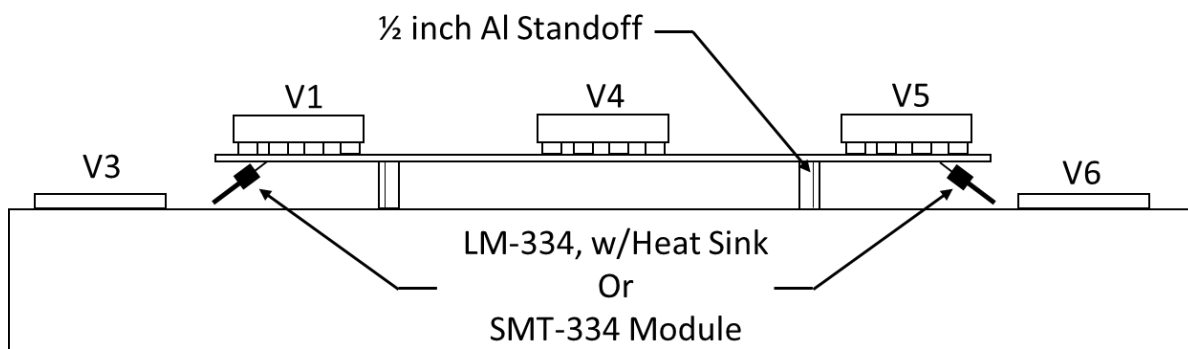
Front View Dyna-70 CCA with underside mounting of SMT-334; mounts in similar fashion to earlier LM-334 TO-92 package.
